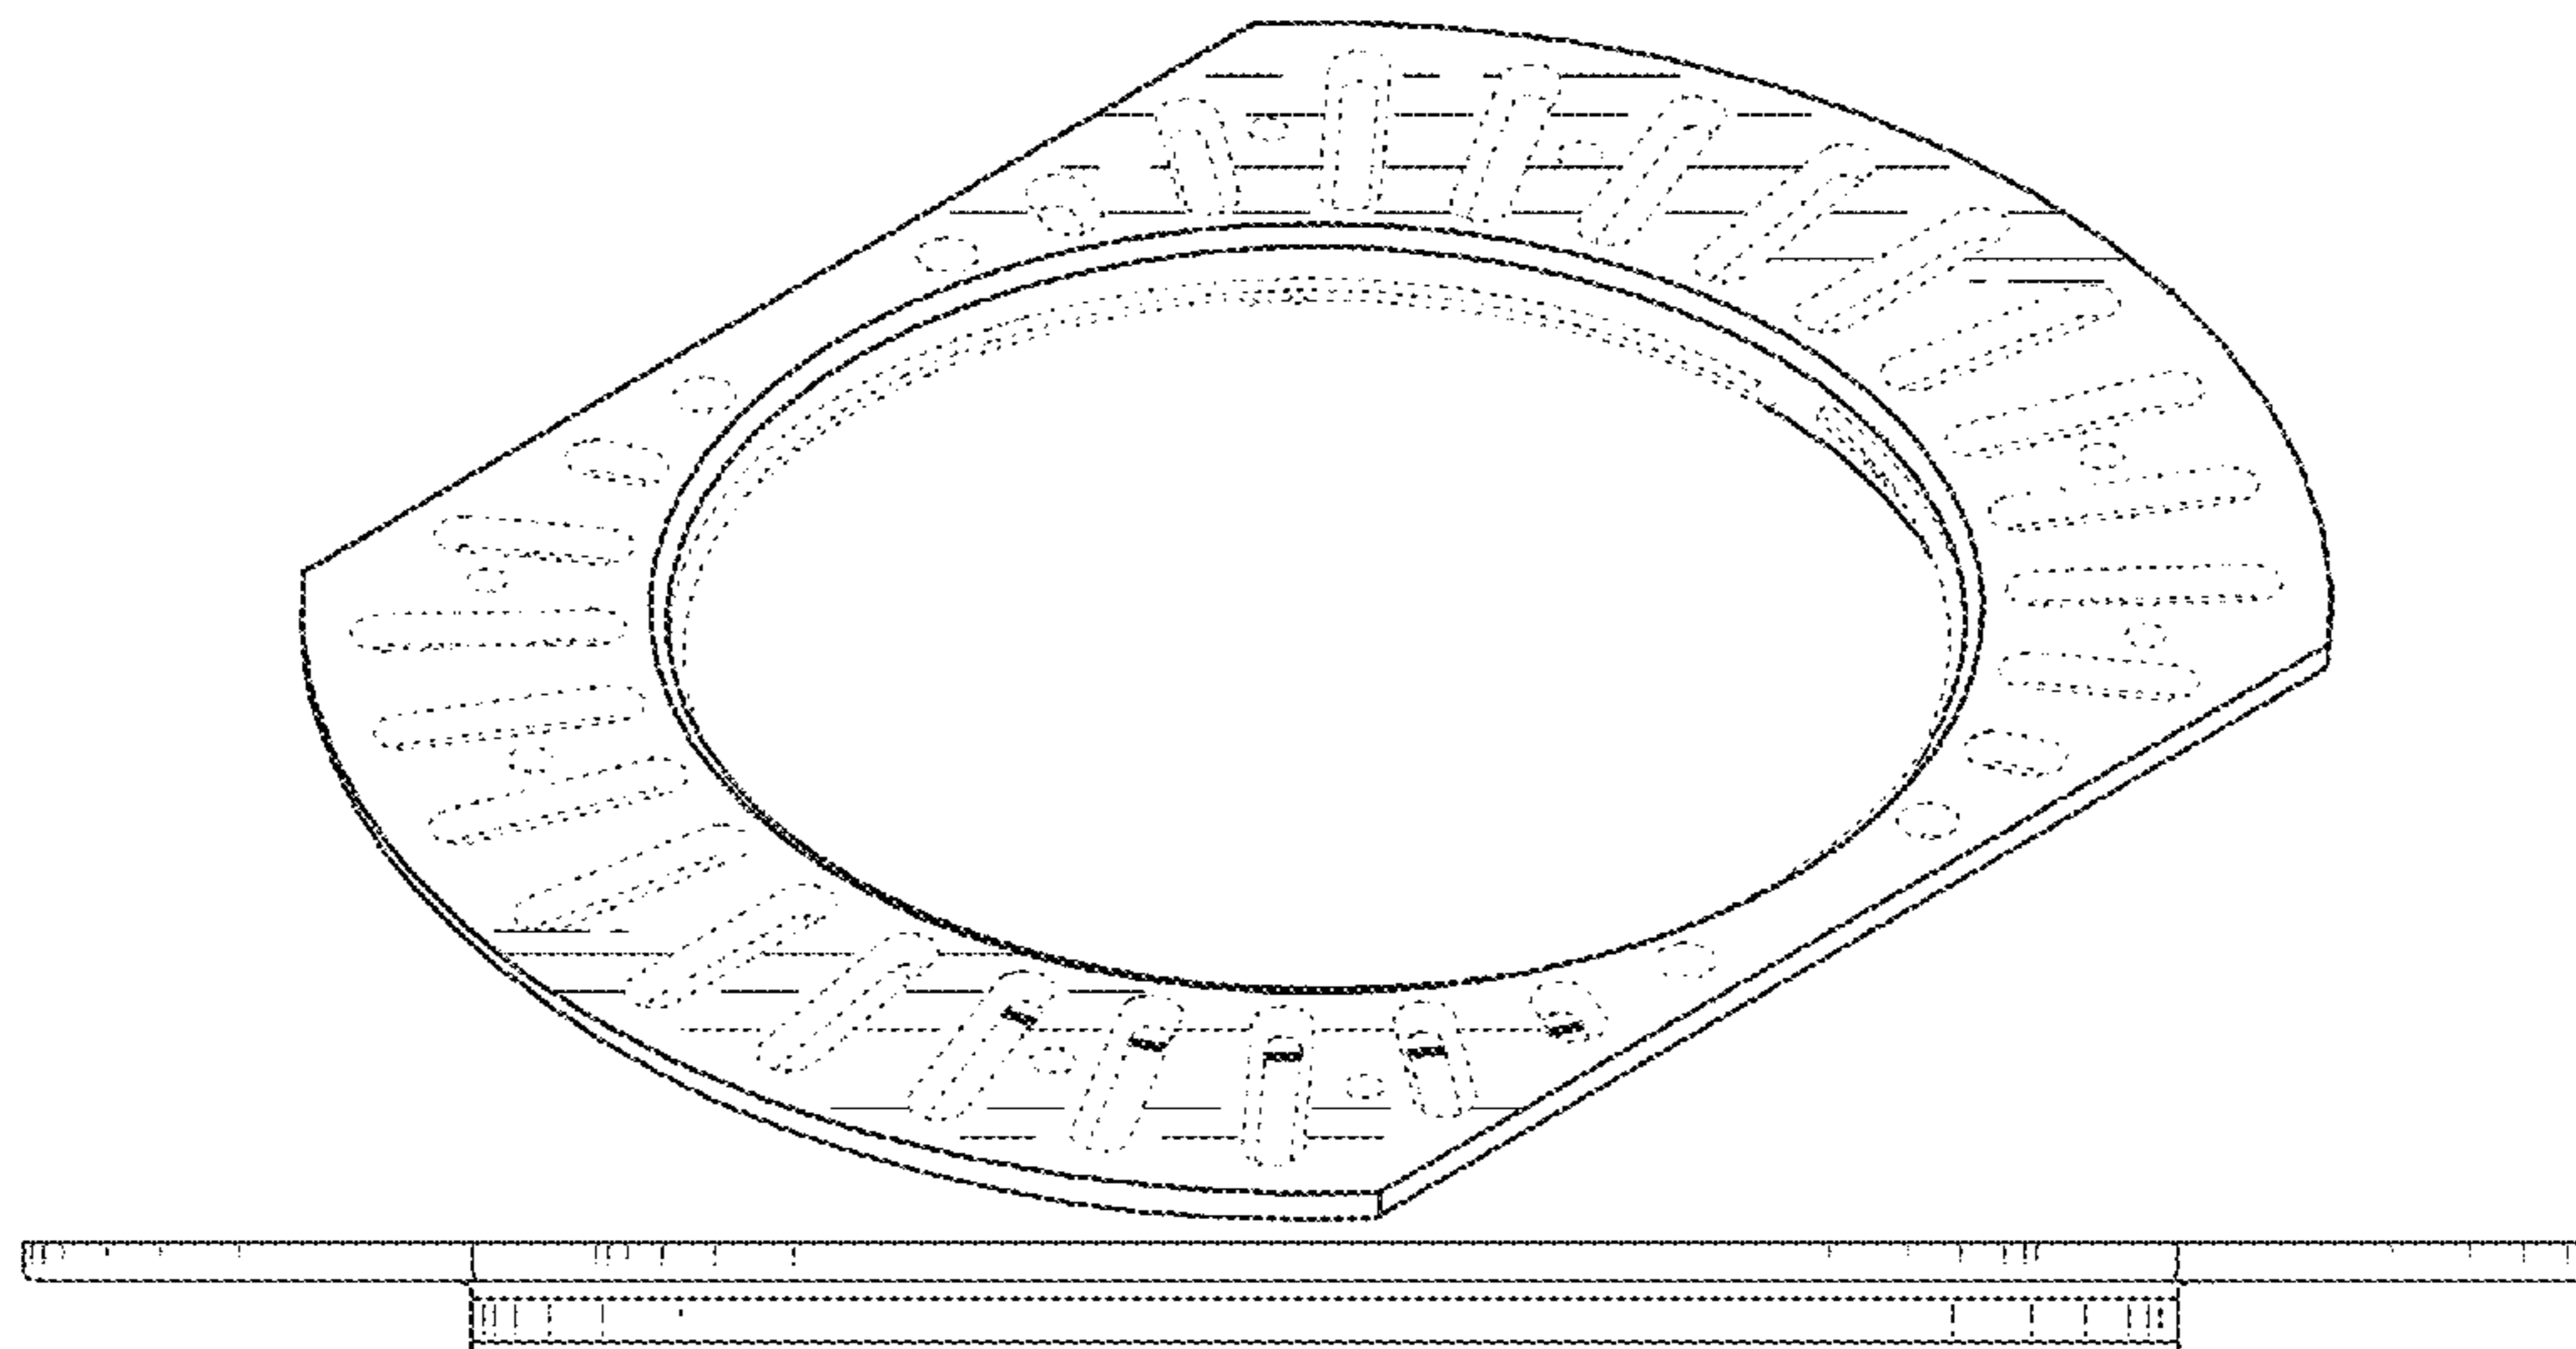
is a top perspective view of an aperture insert component showing the claimed design;
